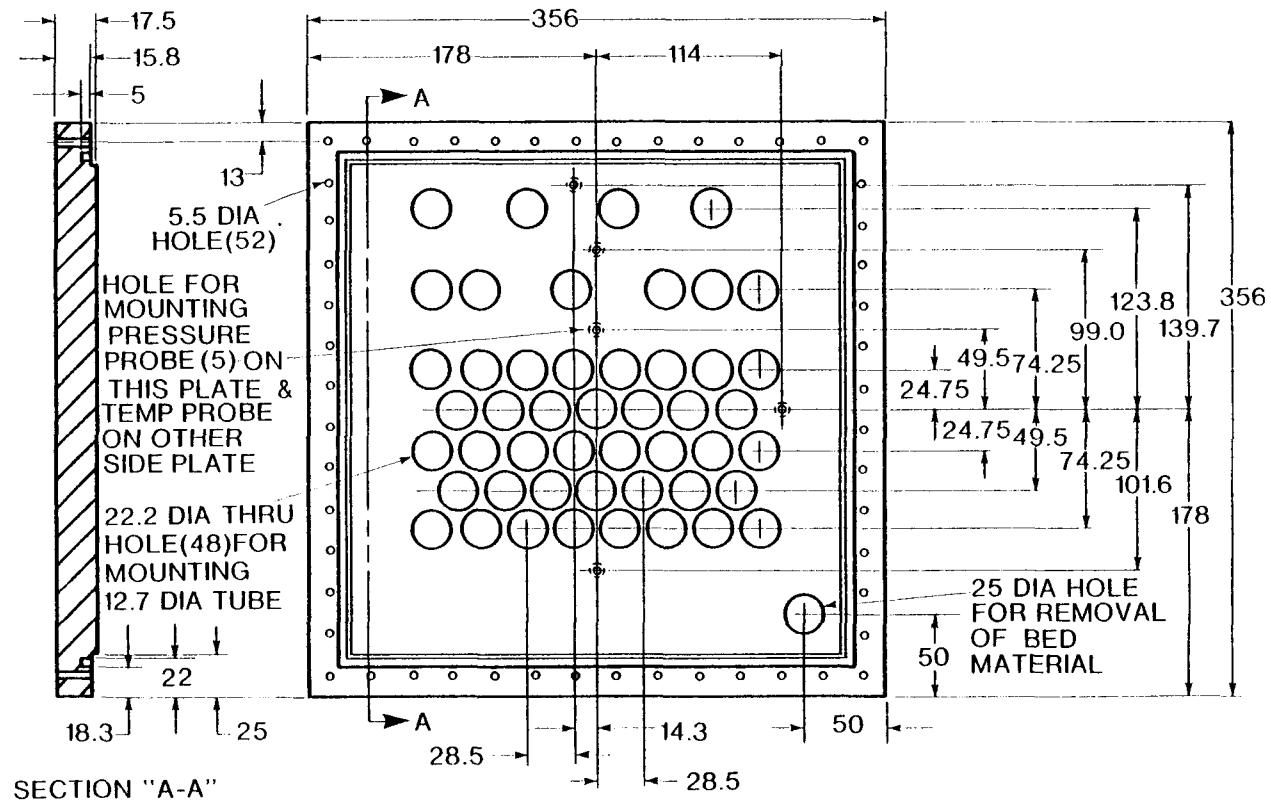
Details of the plexiglas side plate for mounting the heat transfer tube bundles. All dimensions are in mm.
